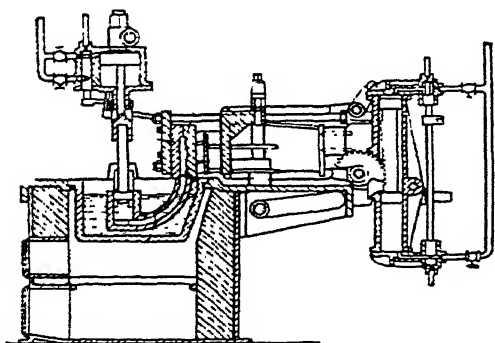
DIE-CASTING MACHINE SHOWING SIDE-GATE PRINCIPLE.
